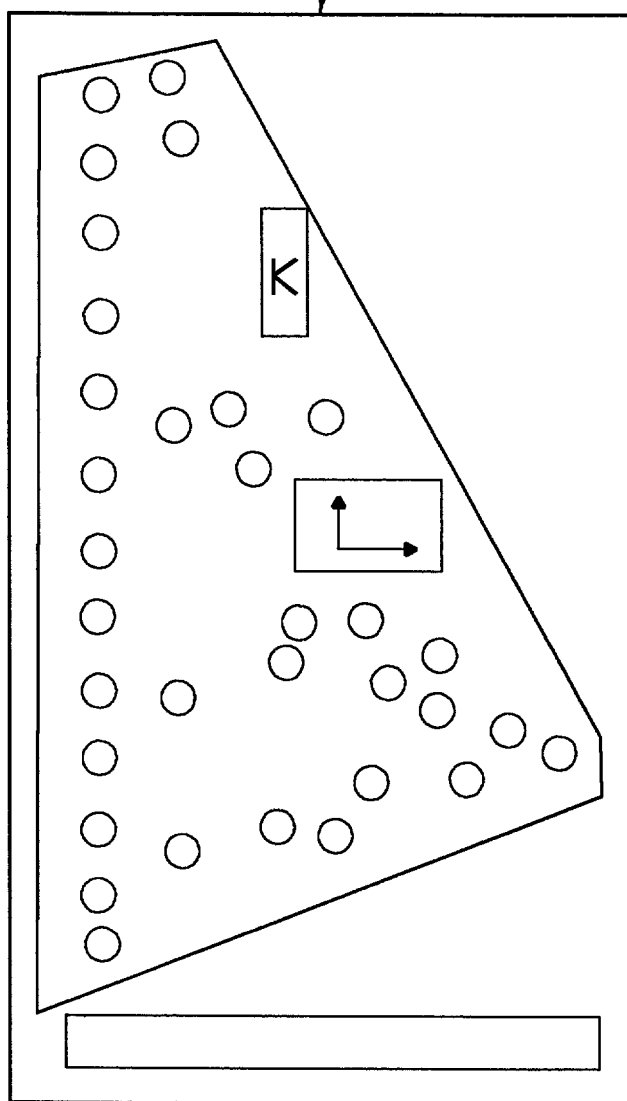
Drilling Holes in Skin or Substructure (Sheet 9)
